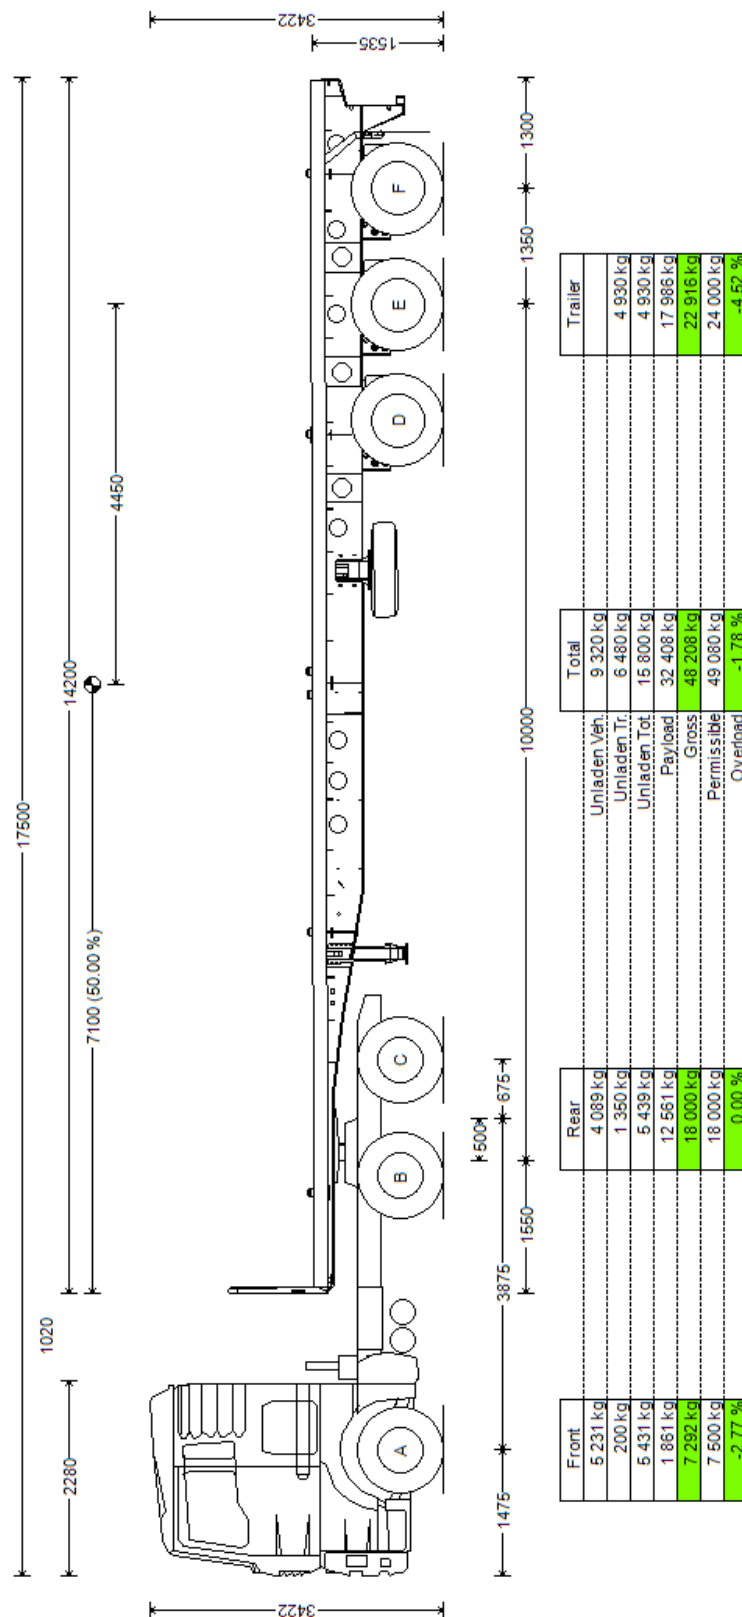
Layout dimensional drawing of Skeletal semi-trailer
